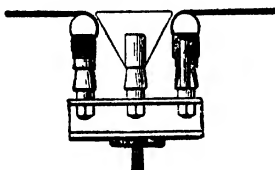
Method of Mounting Block Wires in Line on Telpher System (side elevation)
